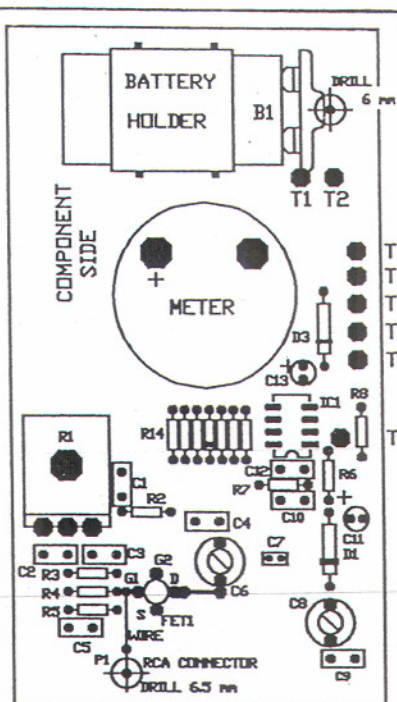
Overlay of the "DEF" pcb showing the position of components. The resistors starting with R14 are shown in Fig 4.
